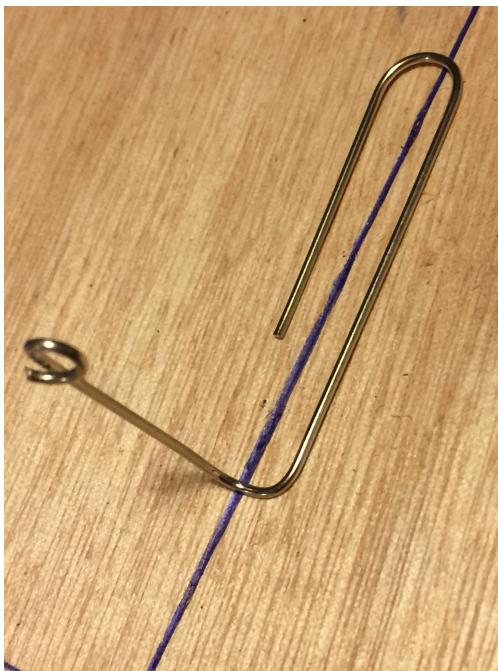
Bend a paperclip to make 2 support bearings for the armature.
